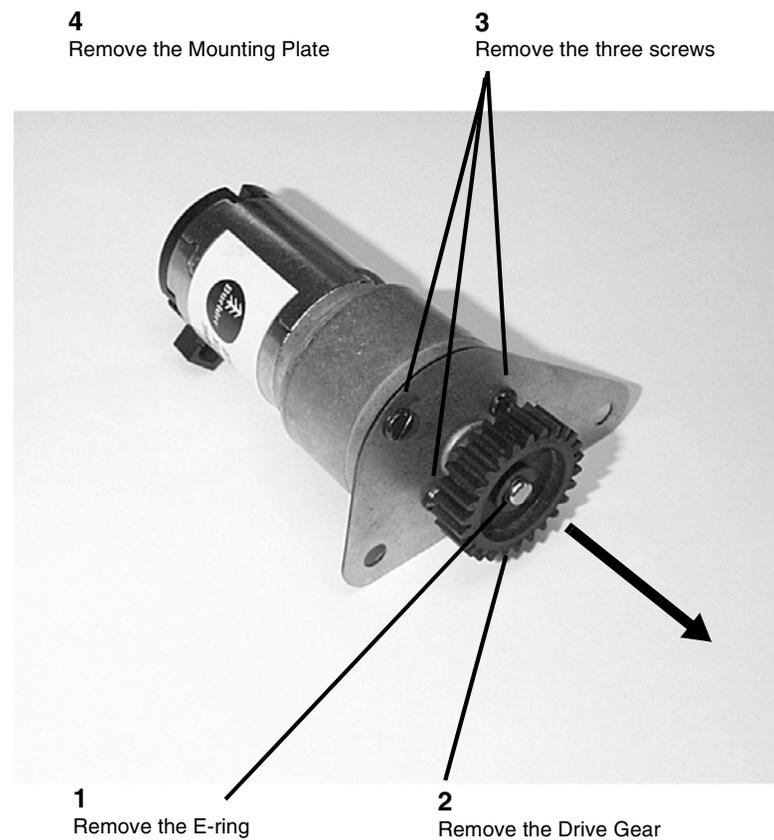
Removing the Cartridge Drive Motor from the Mounting Plate
